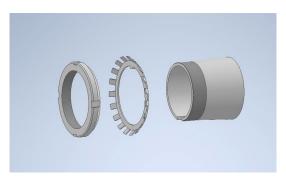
(Left to Right) Bearing Nut, Locking Washer, and Tapered Sleeve
